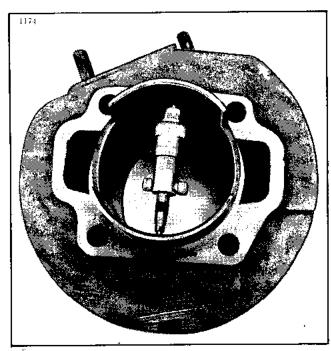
C-69B. Measuring Cylinder 11/2" From Bottom
